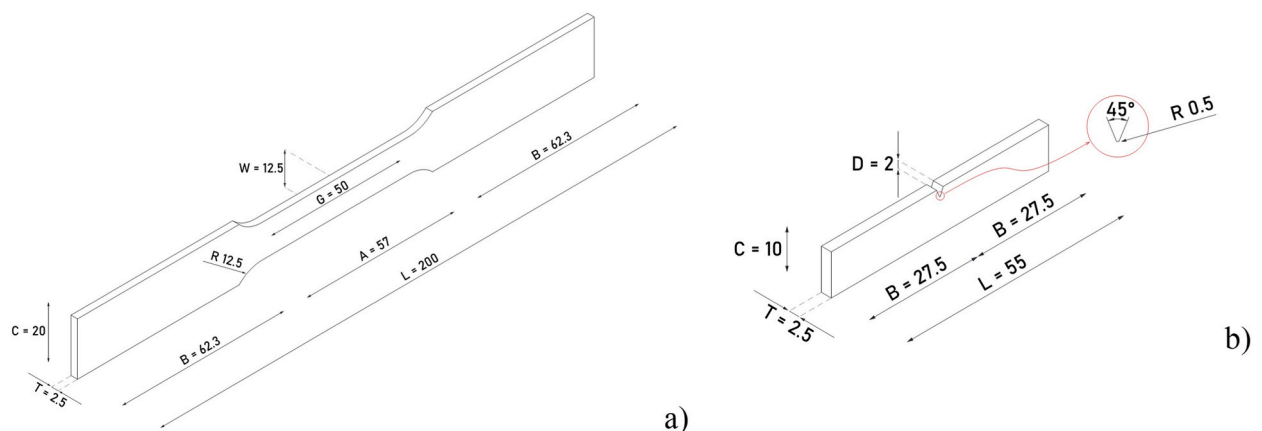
Design and dimensions (expressed in mm) of the specimens used in the experimental activity: (a) Tensile test specimens; (b) V-notch Charpy test specimens.
